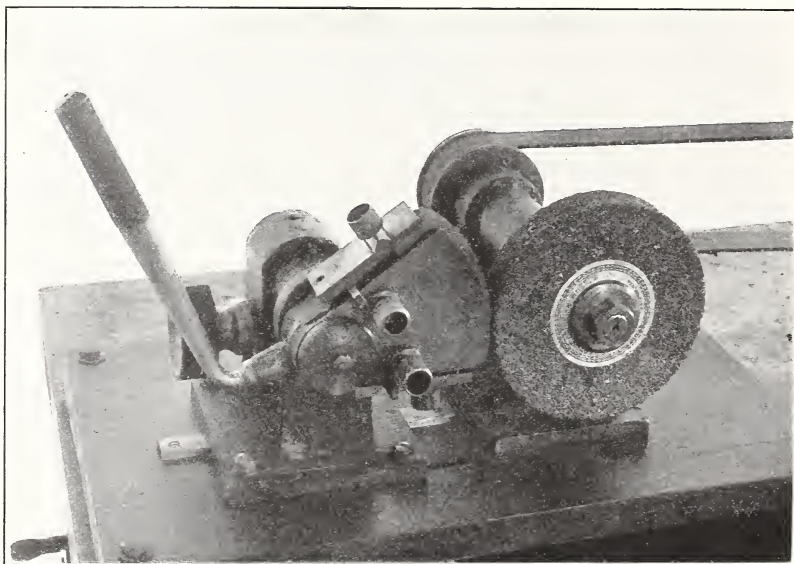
Abrasive wheel for grinding the surface of rubber test pieces to produce a smooth surface
